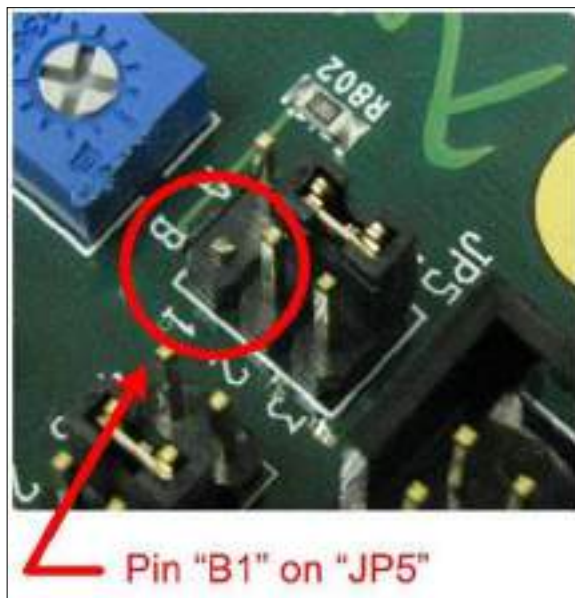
Pin “B1” is Removed on “JP5” and “JP6” During Assembly
